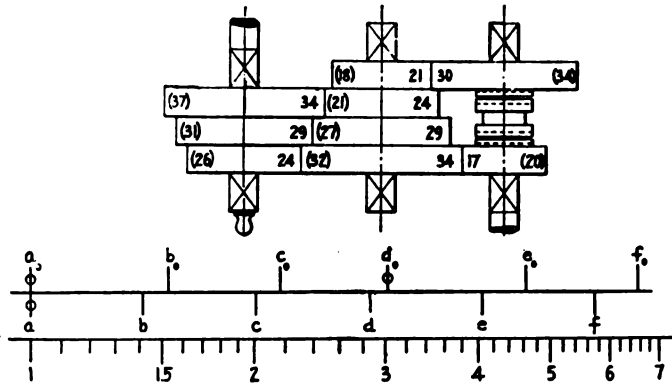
DIAGRAM OF GEARS IN FEED BOX OF A WELL-KNOWN MAKE OF DRILL PRESS
